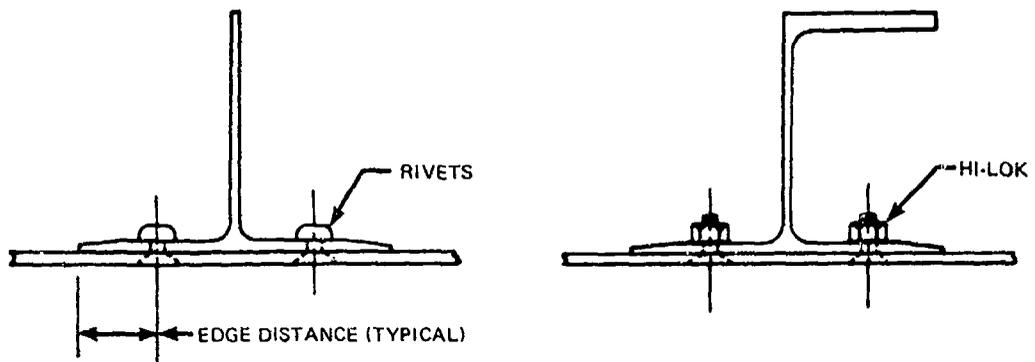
TYPICAL FASTENER INSTALLATION FOR REWORK OF DEBONDED STIFFENERS
